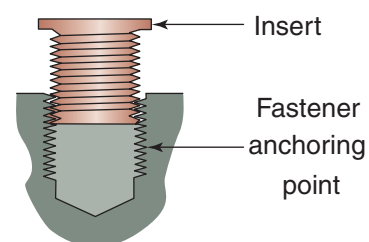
An insert that would assist in the repair of a stripped fastener anchoring point.
